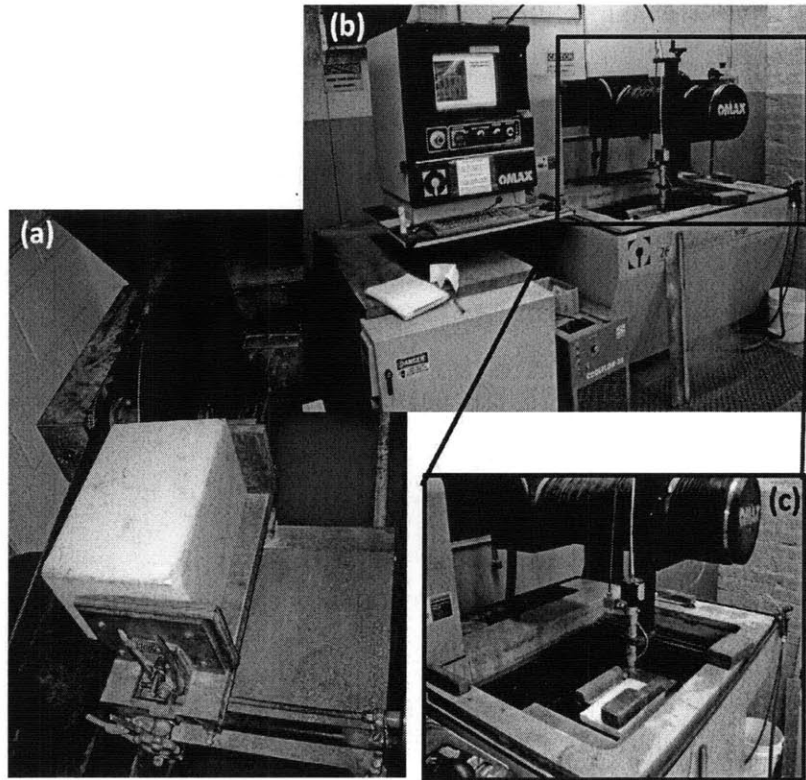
The tools used to cut the samples: (a) Covington Engineering Heavy Duty Slab Saw, (b) OMAX Water Jet, and (c) close-up of sample prior to cutting in Water Jet.
